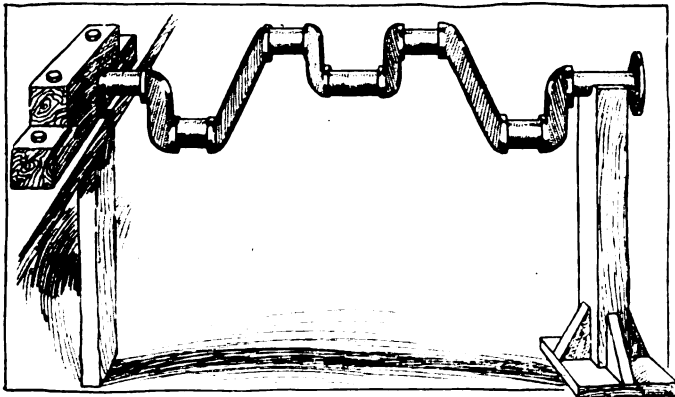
Handy method of holding crankshaft suggested by Beloit repairman
